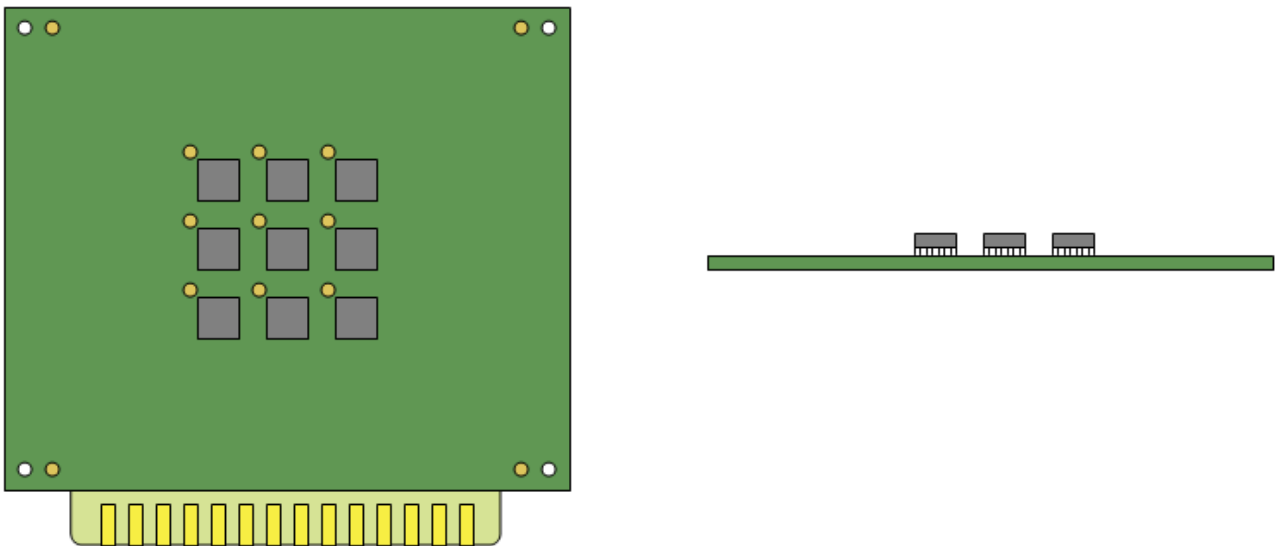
Configuration of a Multiple-IC Edge-type Adapter Test Board
